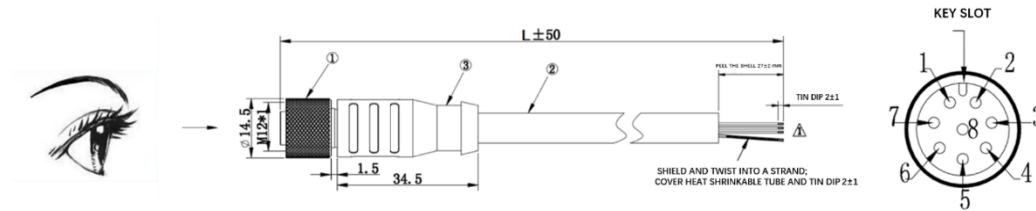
C32W Lidar Extension Cable (unit: mm)
